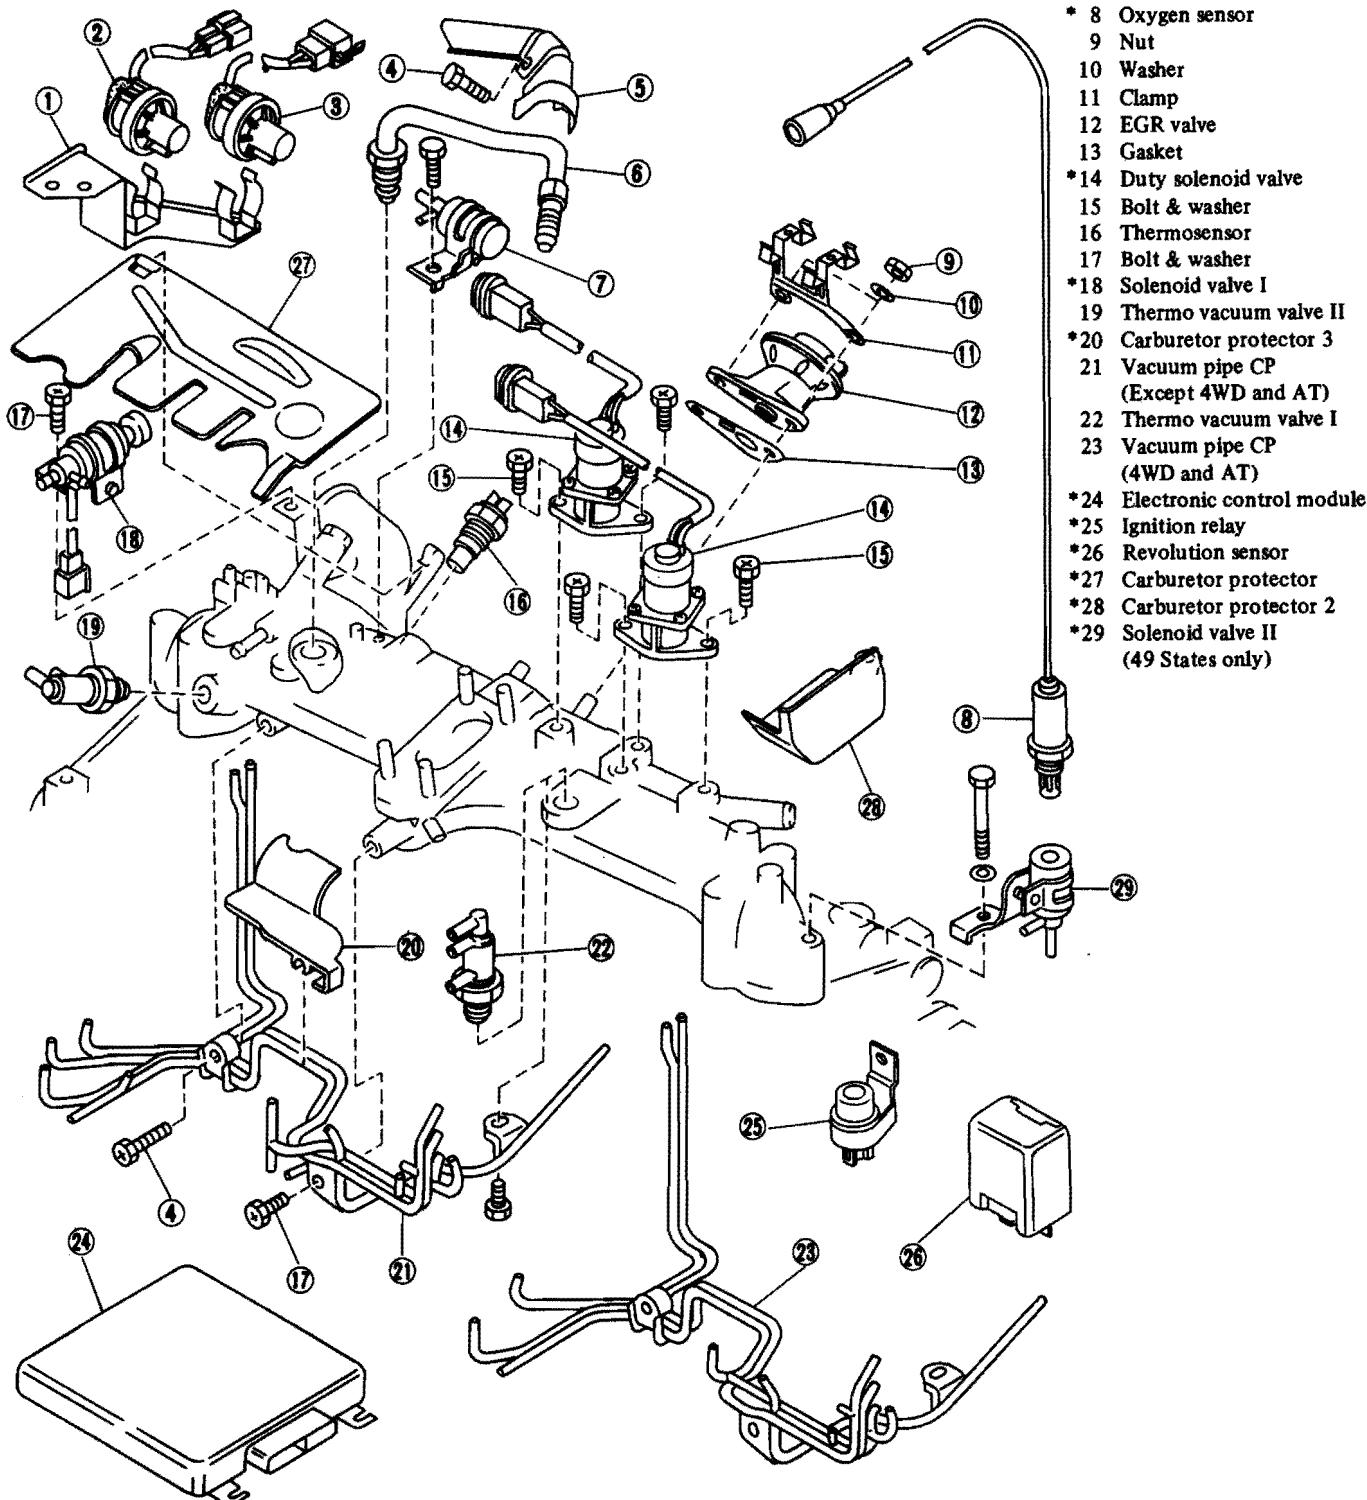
Emission control equipment (Hitachi carburetor type)
